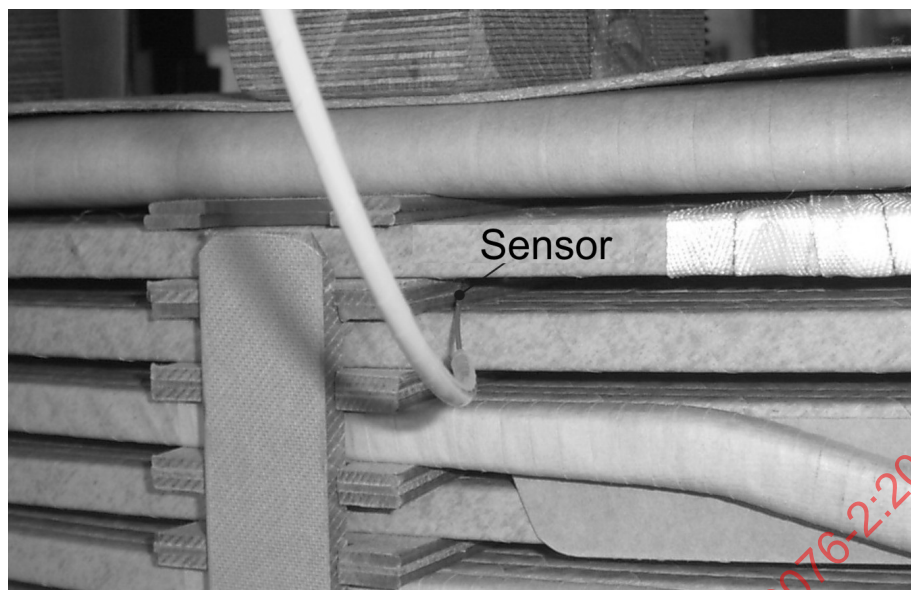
shows how the a sensor could be mounted in a winding of a shell type transformer. Other mounting configurations can be agreed considering the characteristics of the windings.
